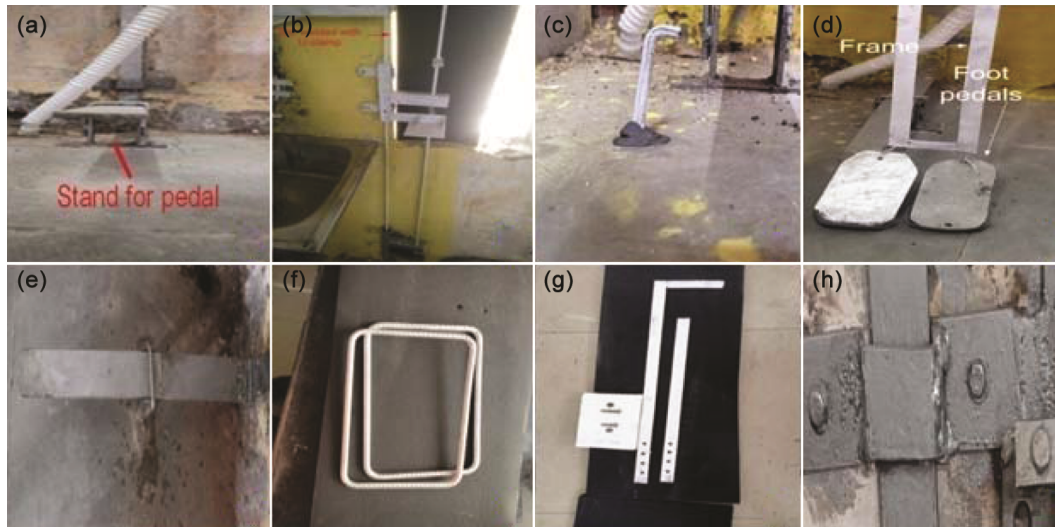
a) Mild steel stand for holding horizontal pedal, b) Bar welded with U-Clamp and pedal, c) L-Shape Hook for holding pedal, d) Foot pedal, e) Horizontal pedal, f) Hanging pedal, g) L-Shape mild steel flat for adjusting the height of one pedal design and h) Clamp used for holding L-Shape flat.
